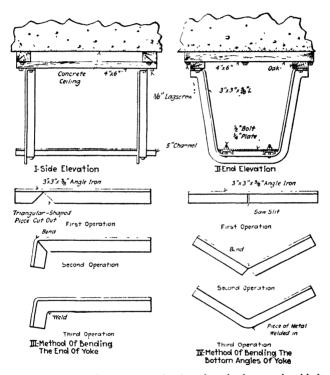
A suspended platform made of steel angles bent and welded at the bends.
